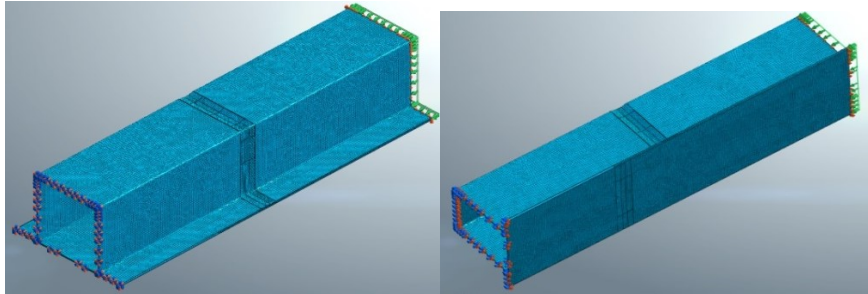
The proposed geometric shape of the side-member and the welded connection.
